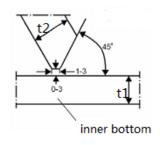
Joint design between lower sloping plate, bulkhead stool sloping plate and inner bottom
